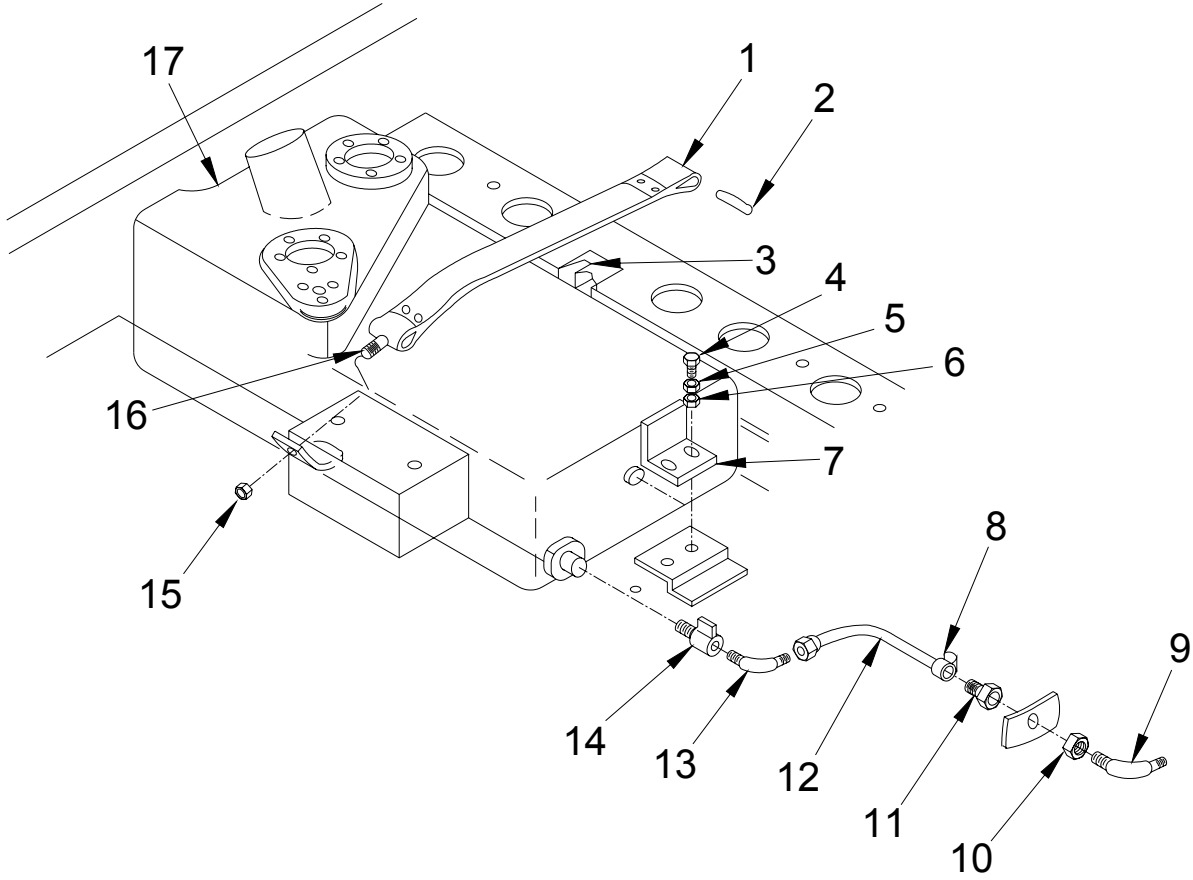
FUEL SYSTEM ASSEMBLY/FUEL TANK
